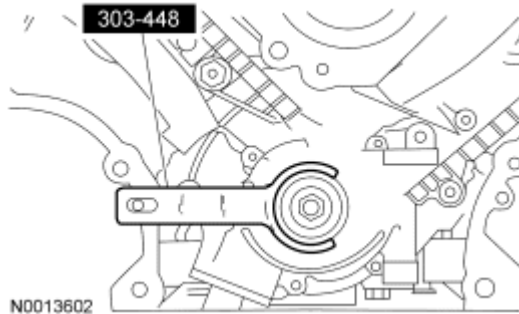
Positioning Crankshaft With Special Tool (303-448)
